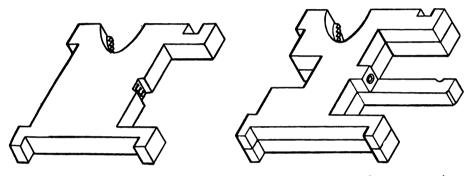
Grantype; slug matrix. FIG. 190.—Grantype; loose-type matrix.
